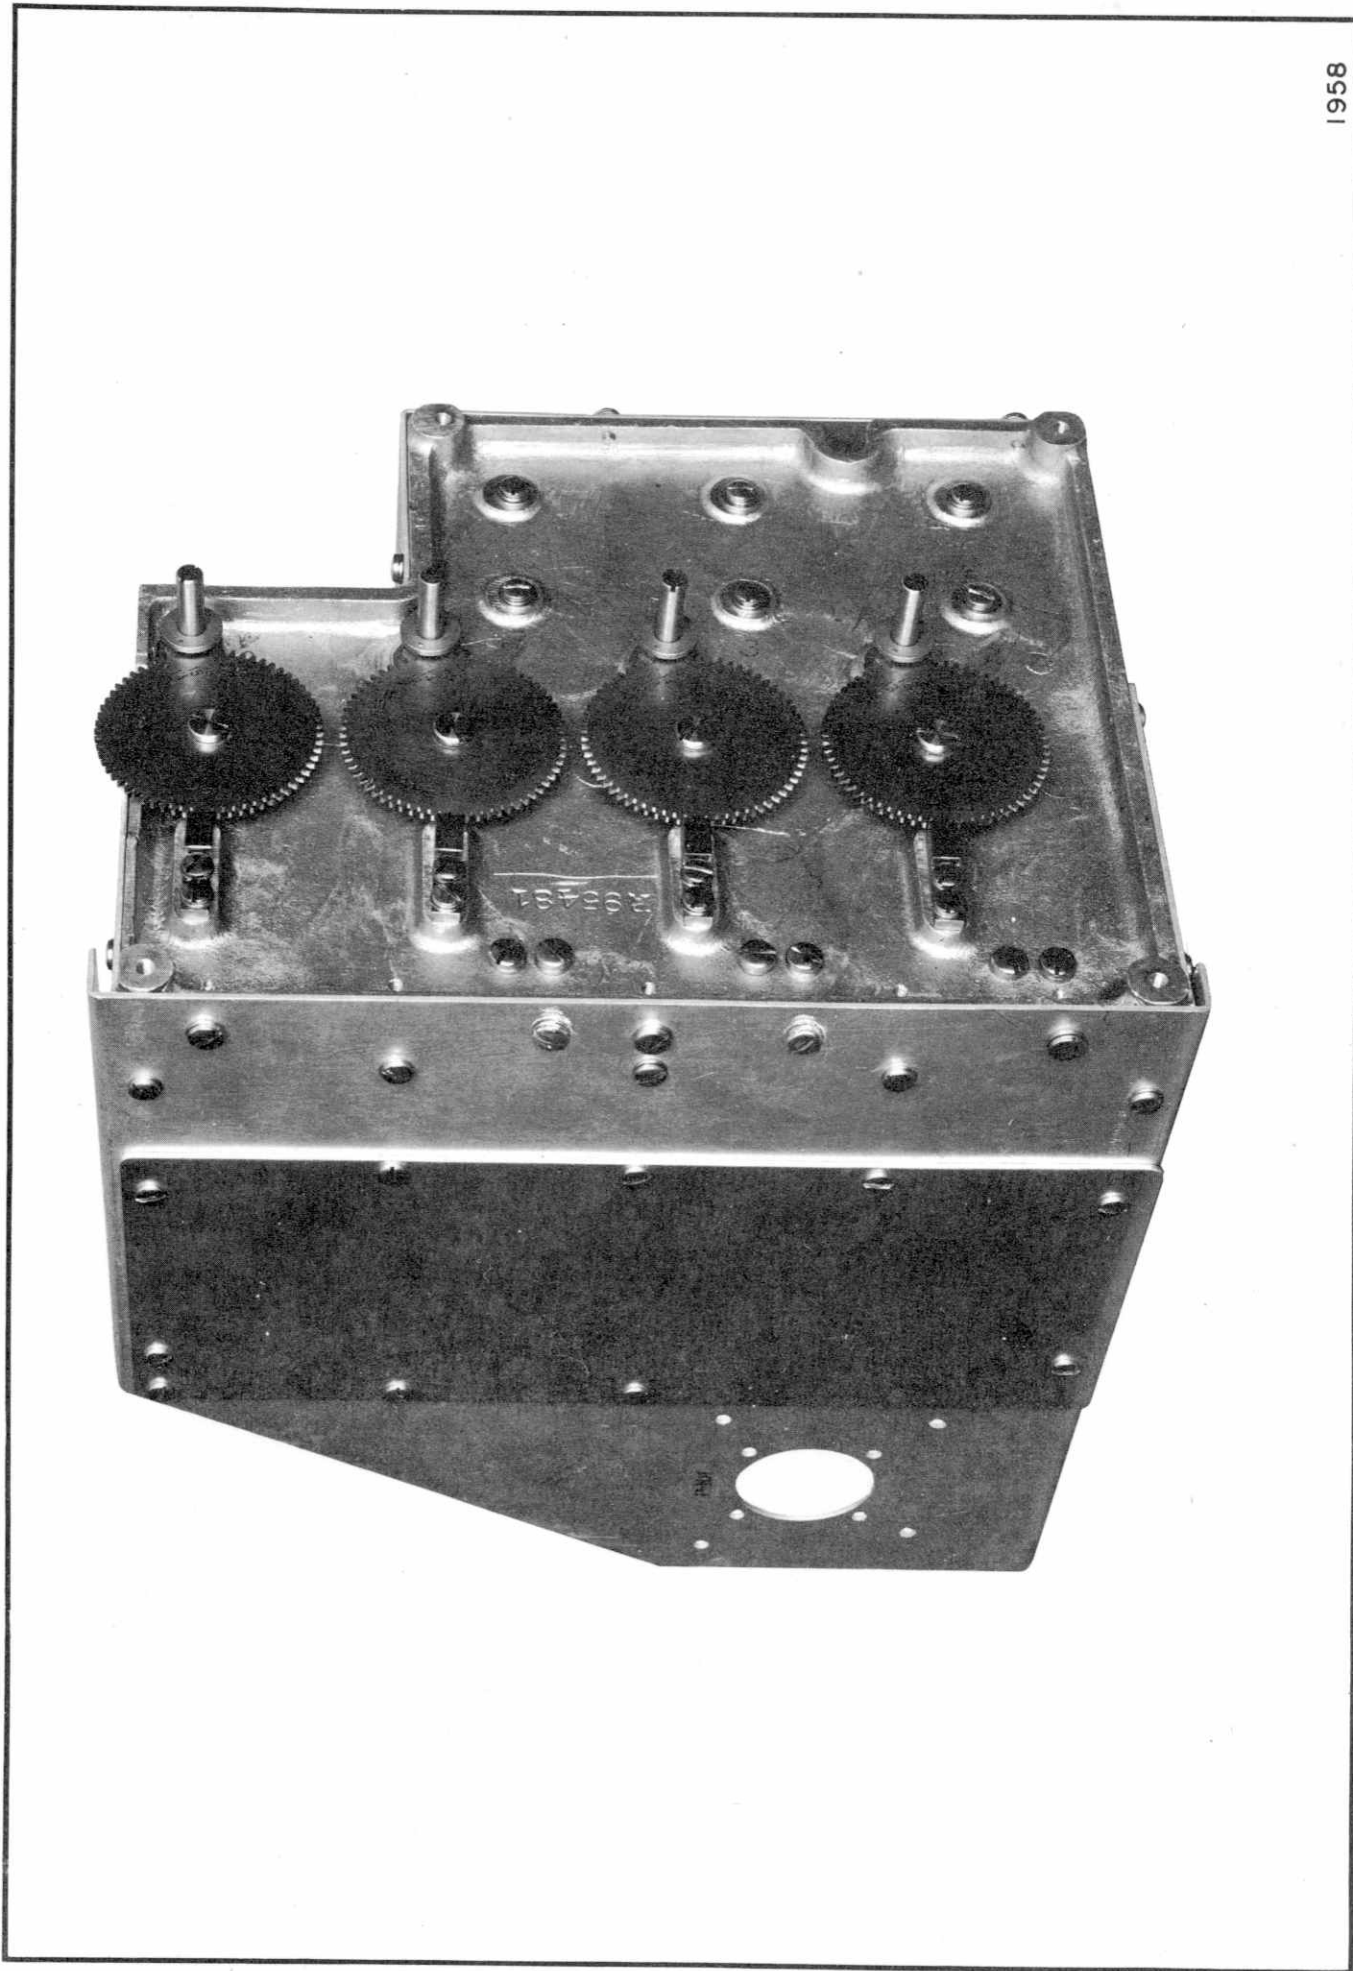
FRONT VIEW OSCILLATOR ASSEMBLY
